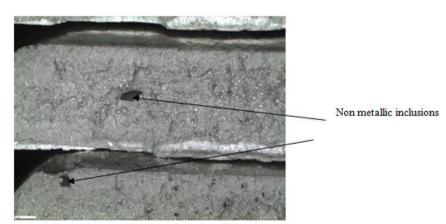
Non-metallic inclusions on the fracture surface, \times 20.
